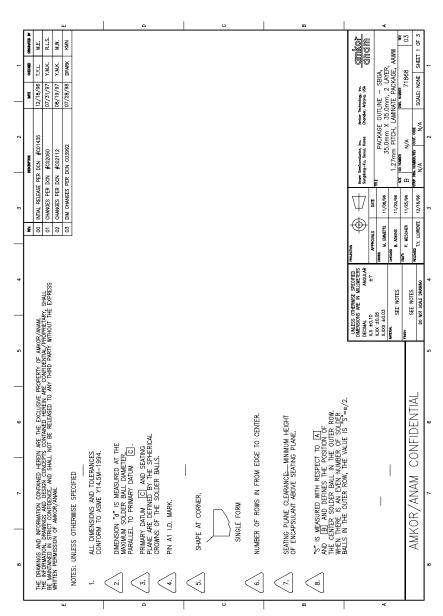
88800 352-Pin BGA Package Drawing (Cont.)
